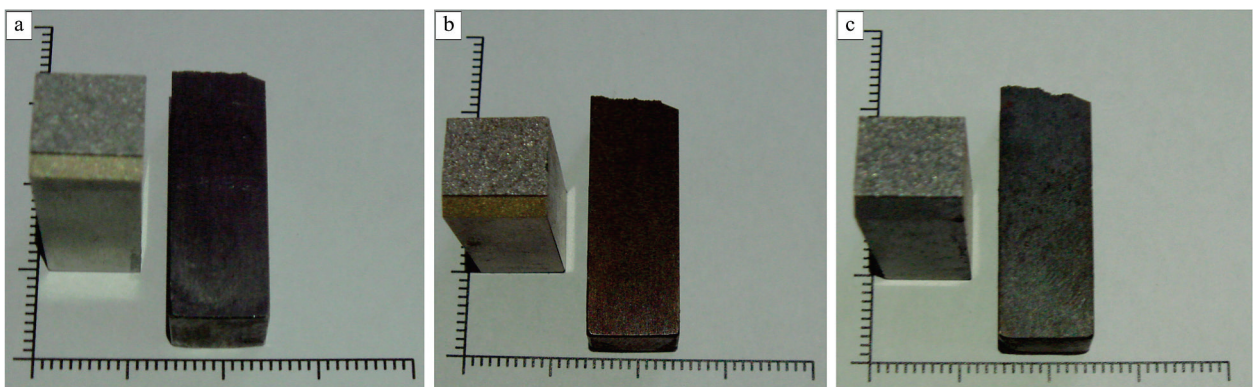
Fracture surfaces of Charpy impact test specimens at different temperatures; a) 20 °C, b) 300 °C, c) 600 °C
